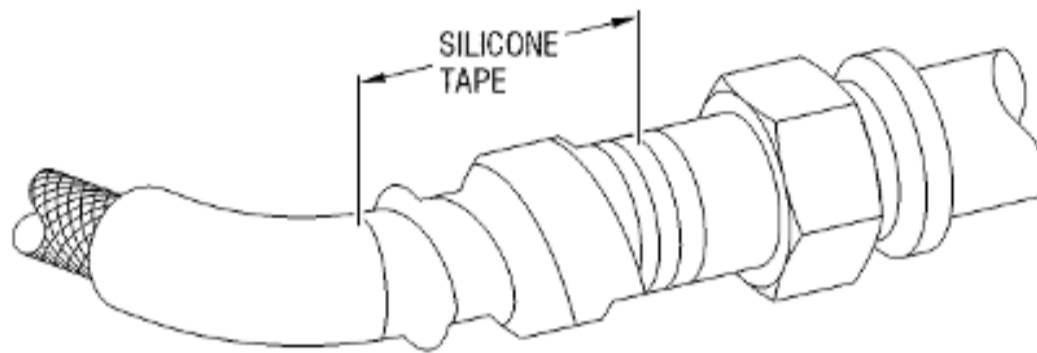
(Sheet 2) Green Electrical Cable - Removal and Installation
